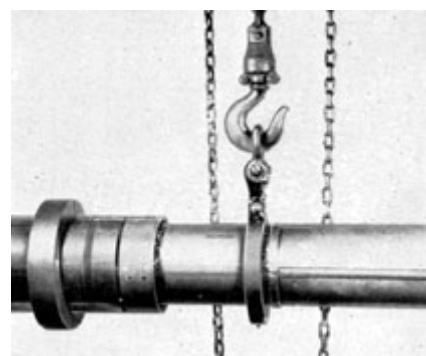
Hinged clamp attached to fifth inner tube section with shackle and inserted chain hoist hook.
